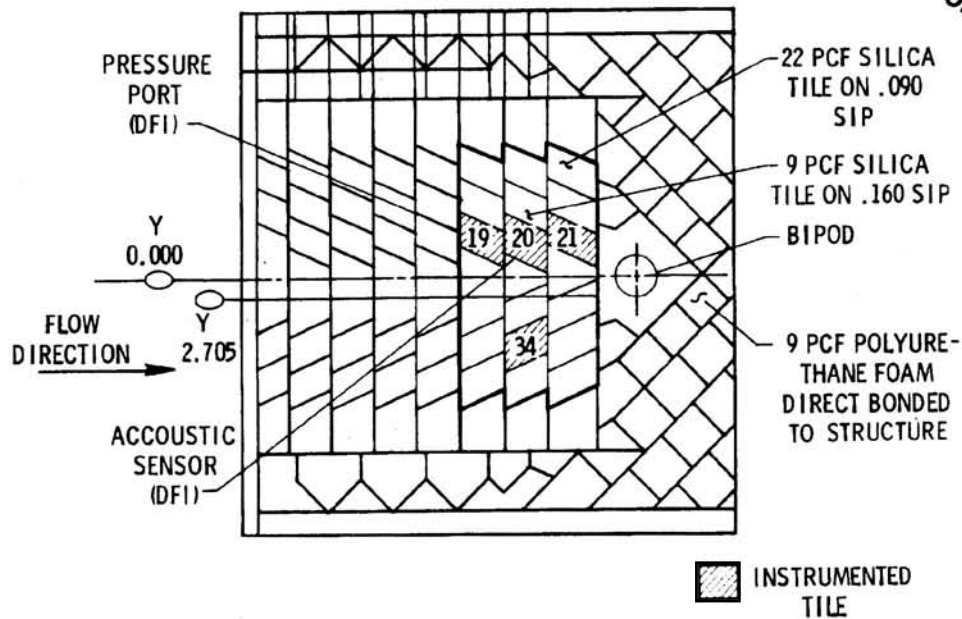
Sketch showing location of instrumented tiles and types of tiles installed on test panel for configuration 20C.
